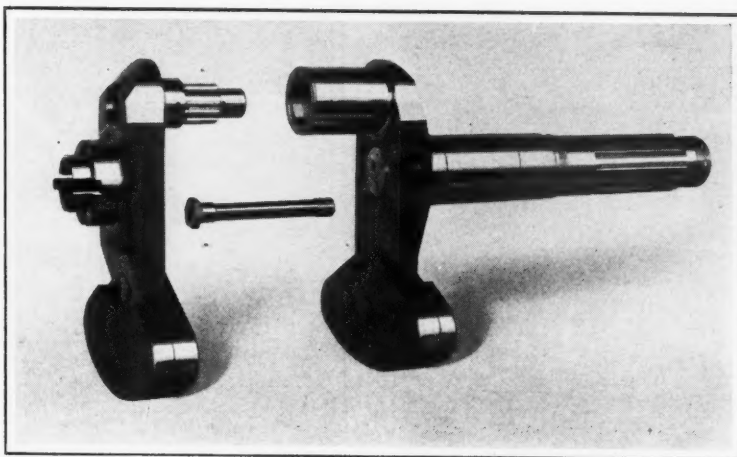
Two-piece Construction of Crankshaft Parts Permits the Solid Master Rod to be Assembled on the Crankpin
